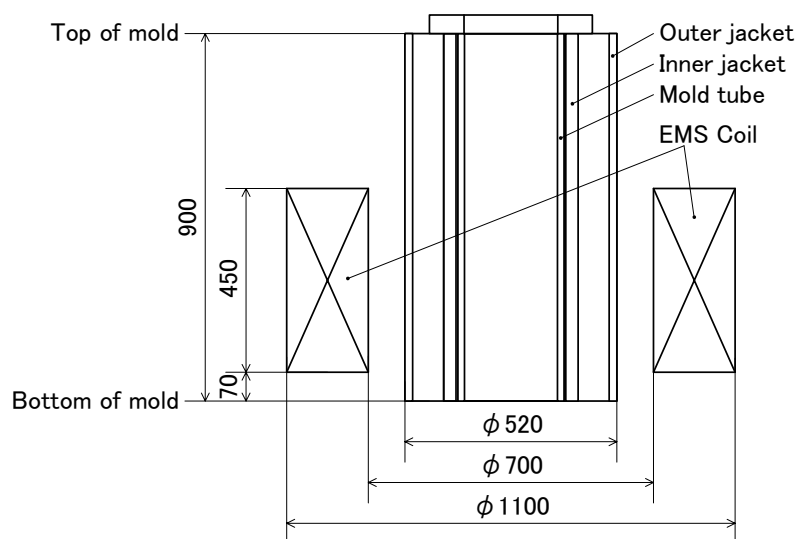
Schematic diagram of mold with M-EMS coil for round billet casting.
